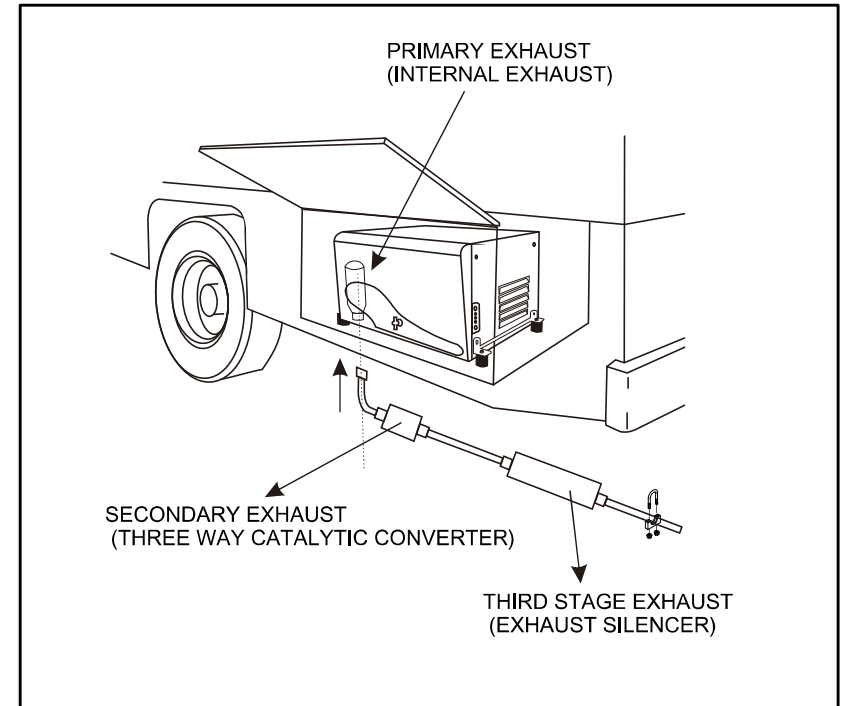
TYPICAL TAILPIPE INSTALLATION
